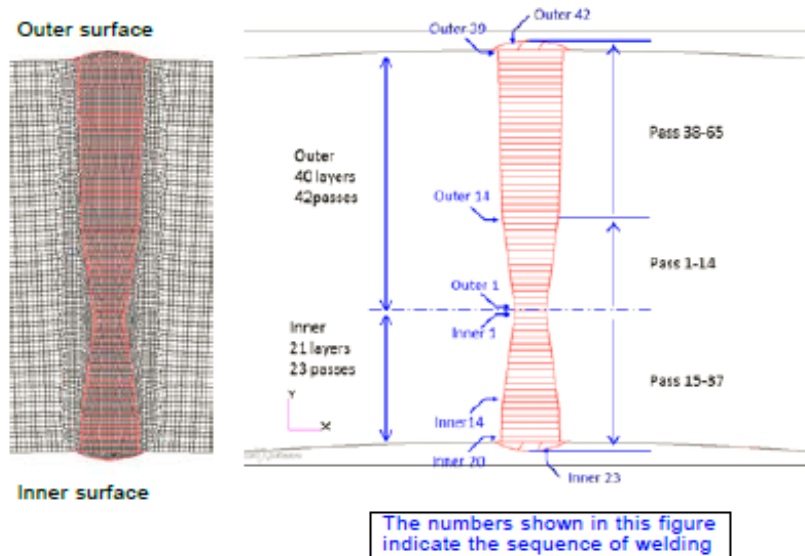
Modeling of Weld Passes (joint welding)
